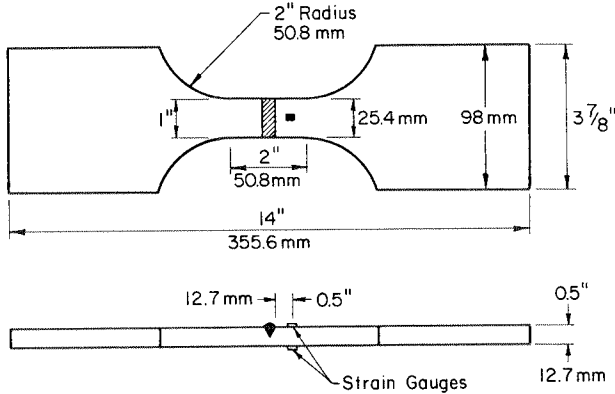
Dimensions of specimens for fatigue testing of as-welded and shot-peened bead-on-plate weldments.
